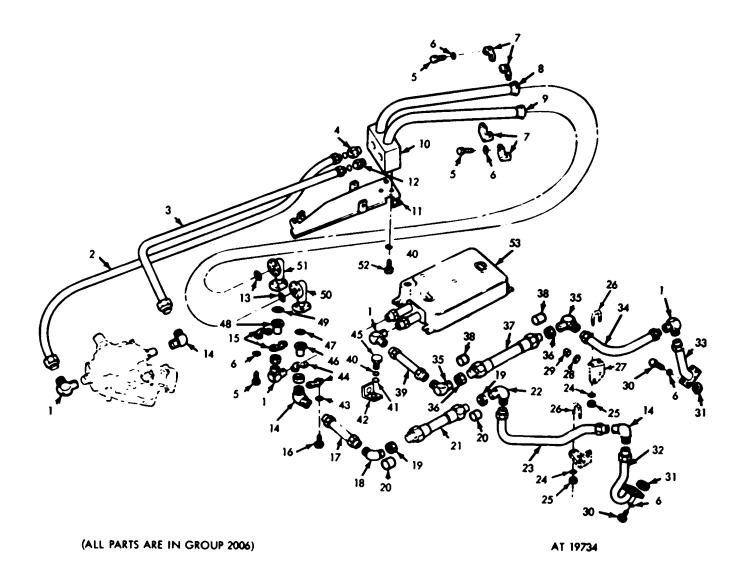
Hydraulic hoses, lines, tubes, fittings, and valves (sheet 1 of 2)-partial exploded view.
